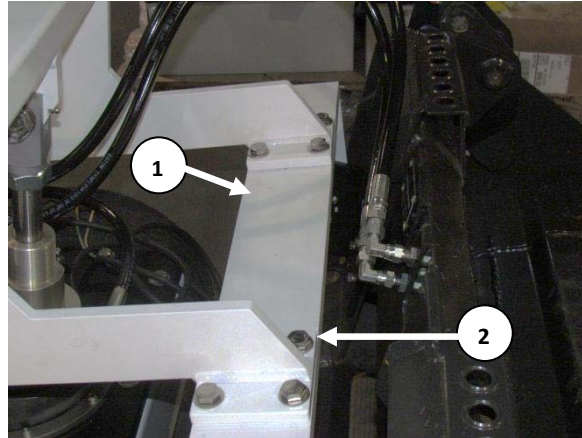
Hydraulic Quick-Disconnect Fittings
